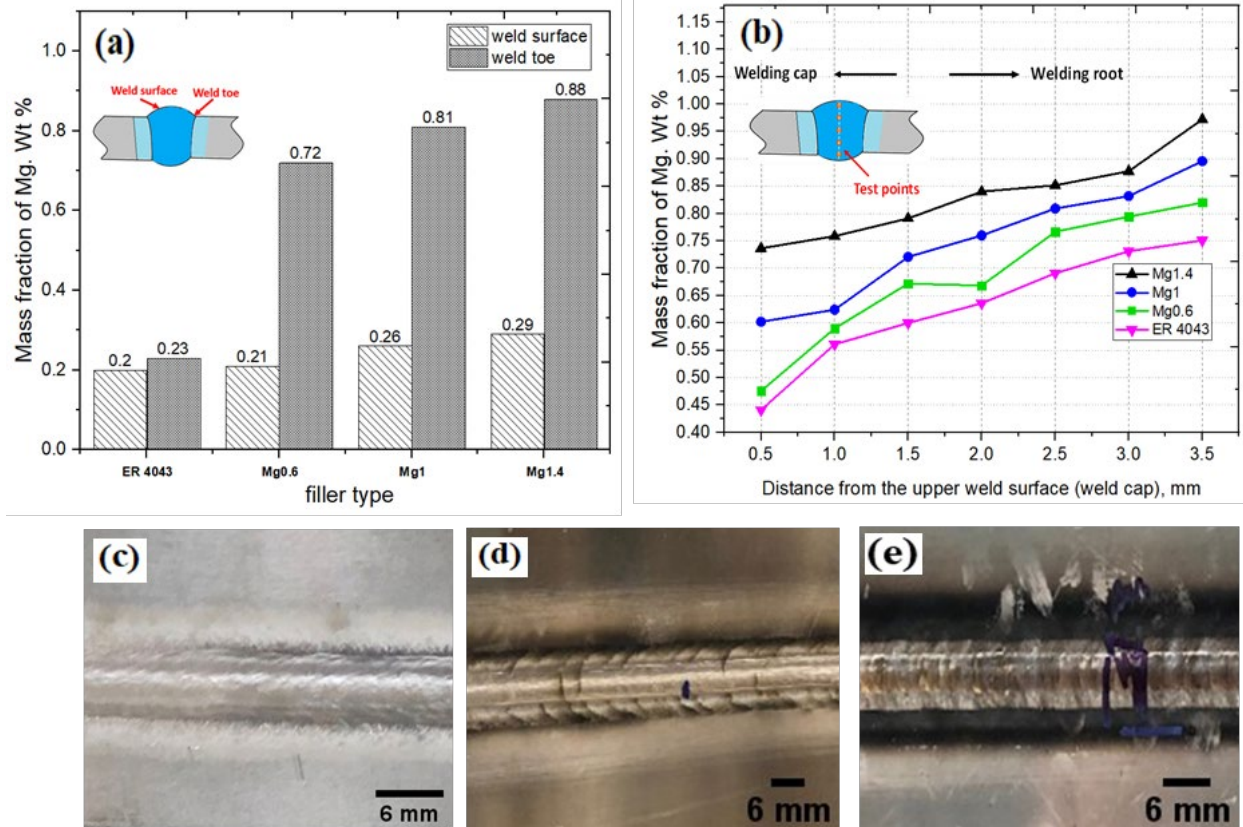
(a) Mg concentration at the weld surface and weld toe, (b) Mg distribution along the weld centerline and macro images of the black smut (Mg and Al oxides) around the weld bead in (c) ER4043, (d) Mg0.6, and (e) Mg1.4 joints.
